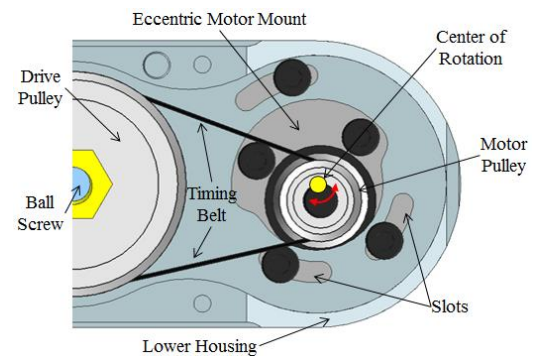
Eccentric motor mount for belt tensioning (top view of bearing housing)
